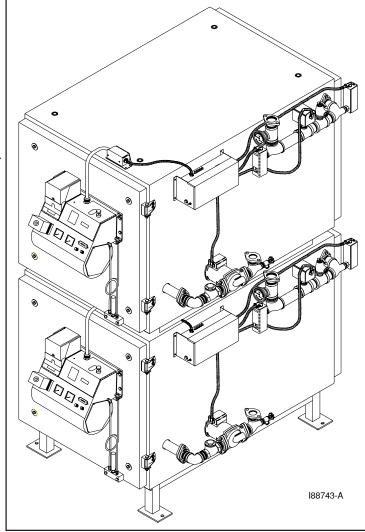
C - Dual-Stacked Boilers (Completely Assembled)
